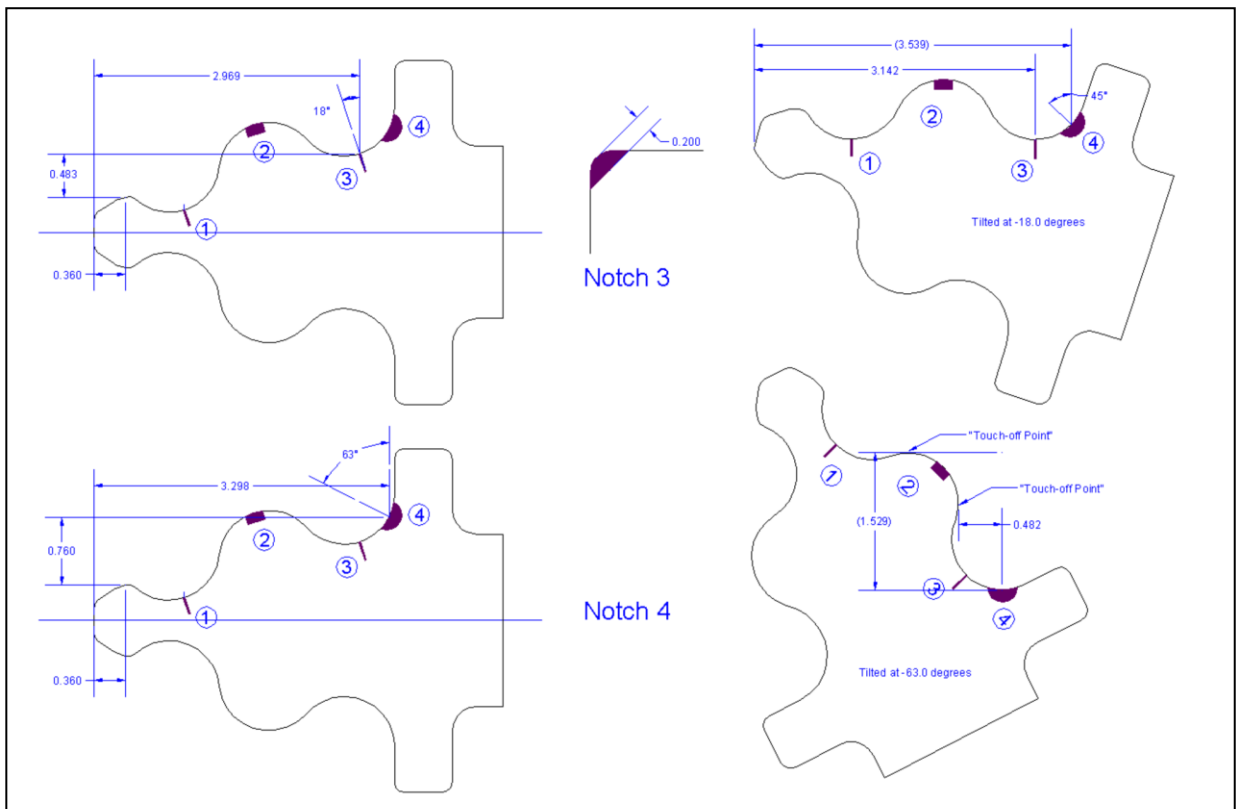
Method 1 and Method 2 drawings for notches 3 and 4
